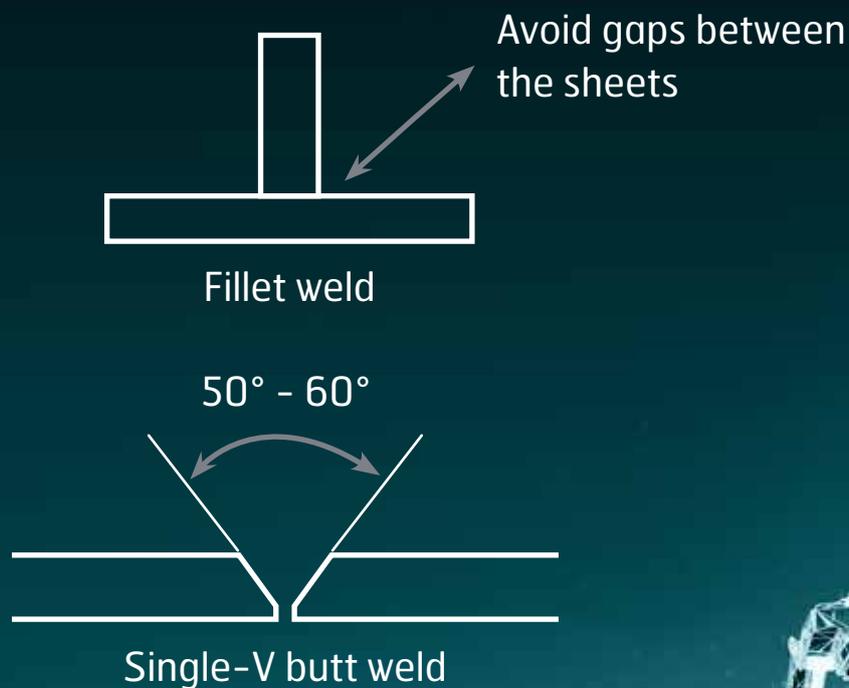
Examples of joint configurations for MAG welding of sheets in the thickness range 3-10 mm.
